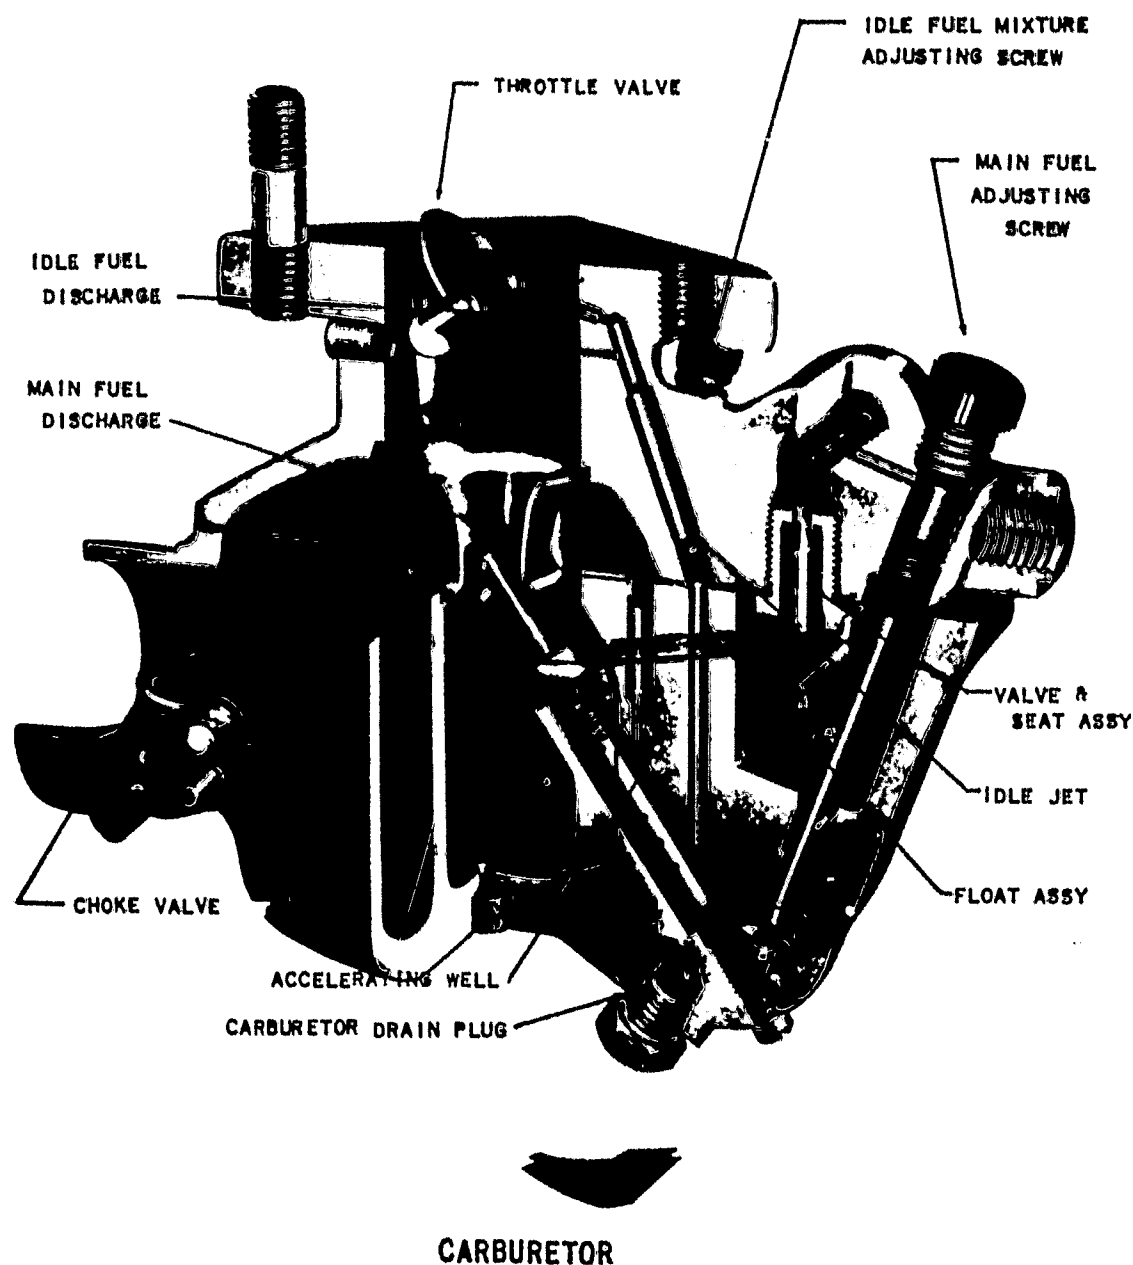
B.—Cutaway view of a modern carburetor for a tractor.
